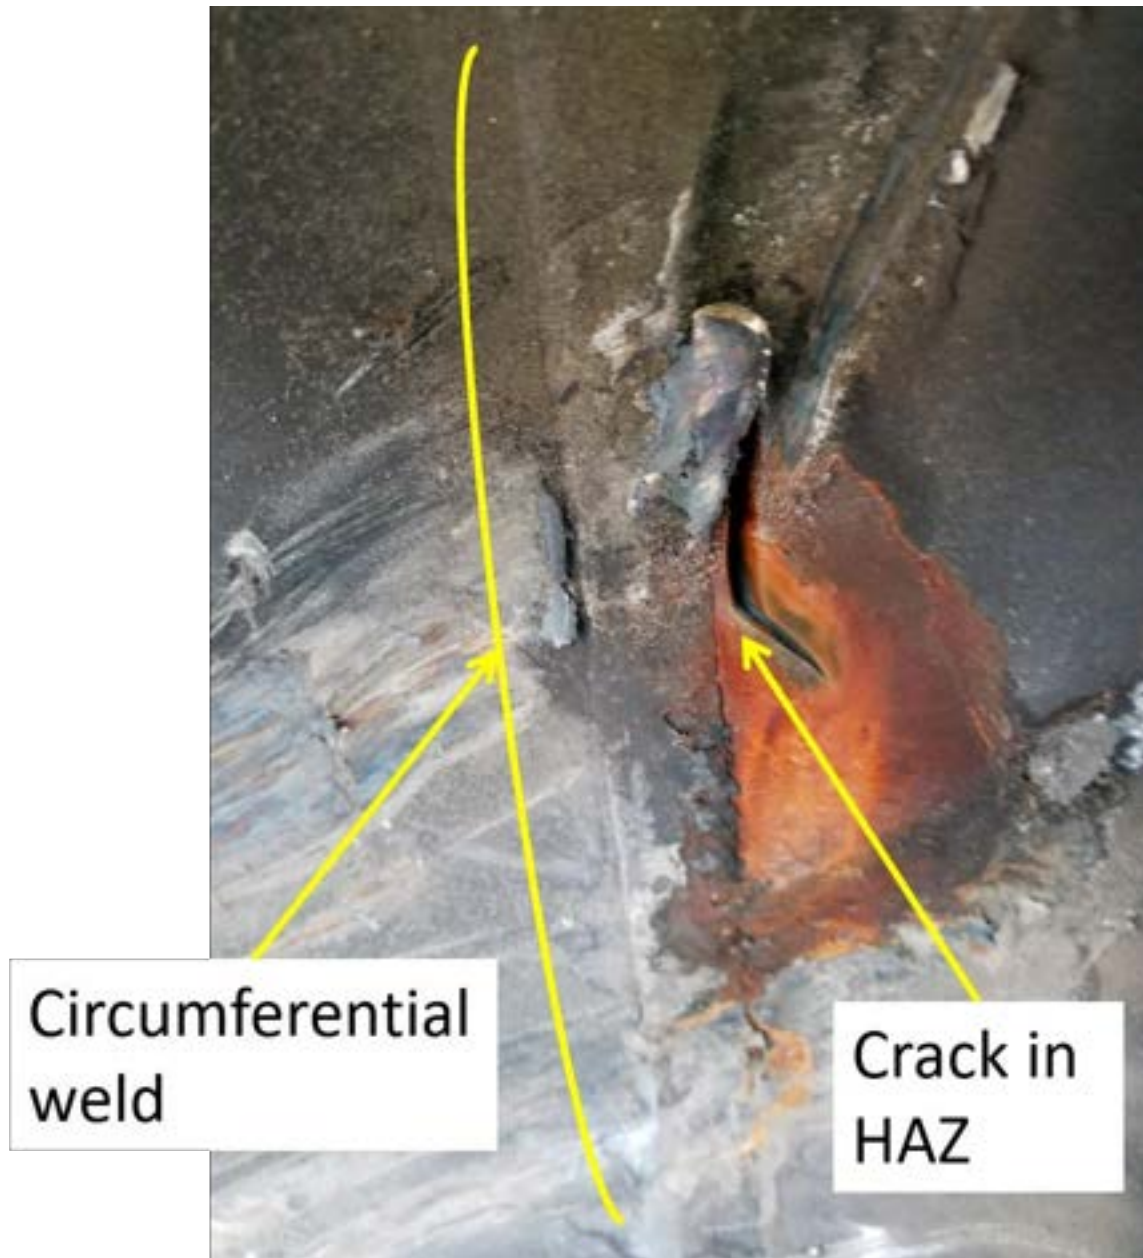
When damage crosses a tank shell weld, look for damage in the heat affected zone (HAZ) immediately adjacent to the welds.¹⁸
